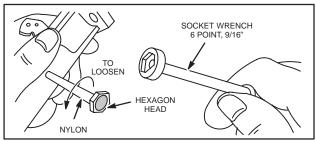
INSTALLING NYLON FUEL PICK-UP TUBE
